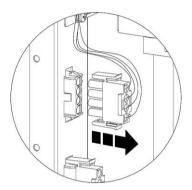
Unplugging the electric heater wiring terminal
